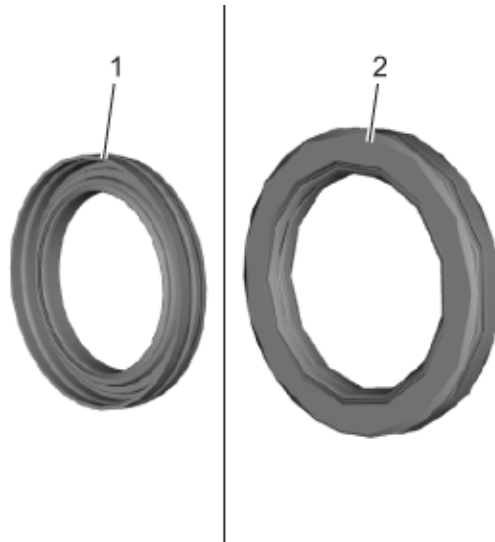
Identifying Crankshaft Front Oil Seal Designs
